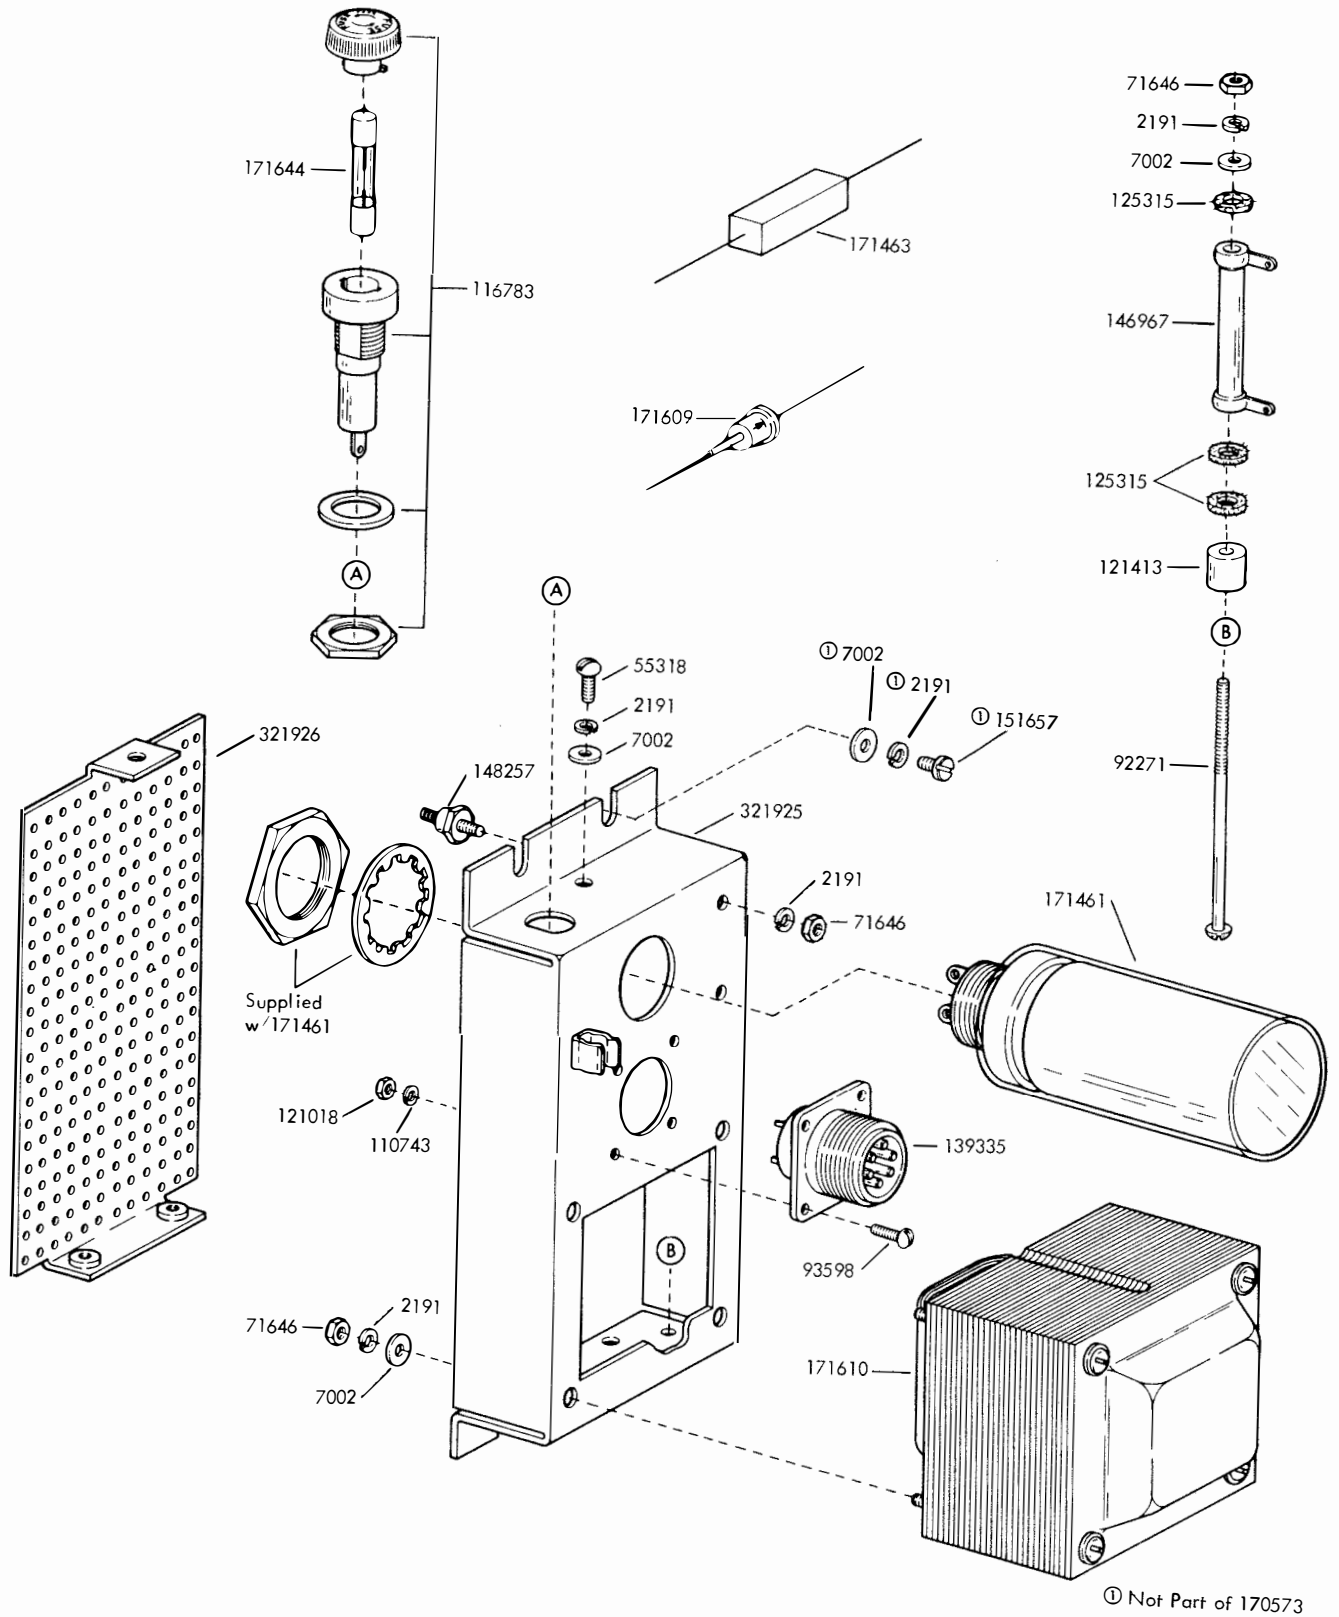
170573 RECTIFIER ASSEMBLY
